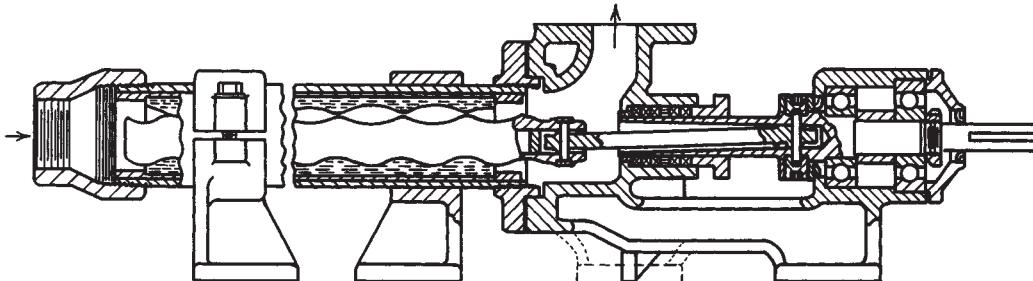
Single-rotor screw pump with an elastomeric lining. (Courtesy of Moyno Pump Division, Robbins & Myers, Inc.)
